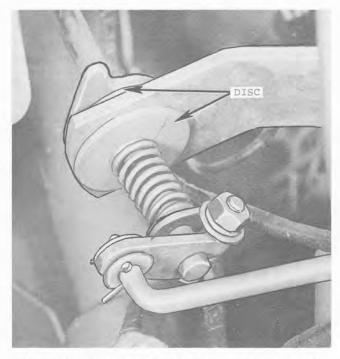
Throttle Control Lever Adjustment (Diesel Model)
